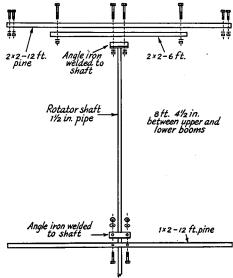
Assembly of booms and rotator shaft. All bolts are $\frac{1}{4}$ inch.
